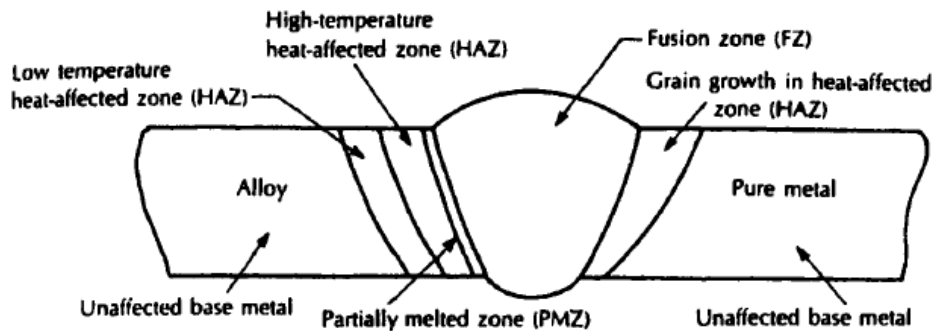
1 Microstructural zones of fusion welding [14].
